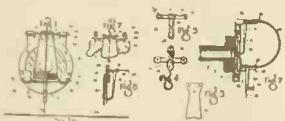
is an edge view of a modified form of spring before bending. Fig. 7 is a partial front view, showing a modified mounting for the reproducer lever. Fig. 8 is a section on the line 8-8 of Fig. 7.
